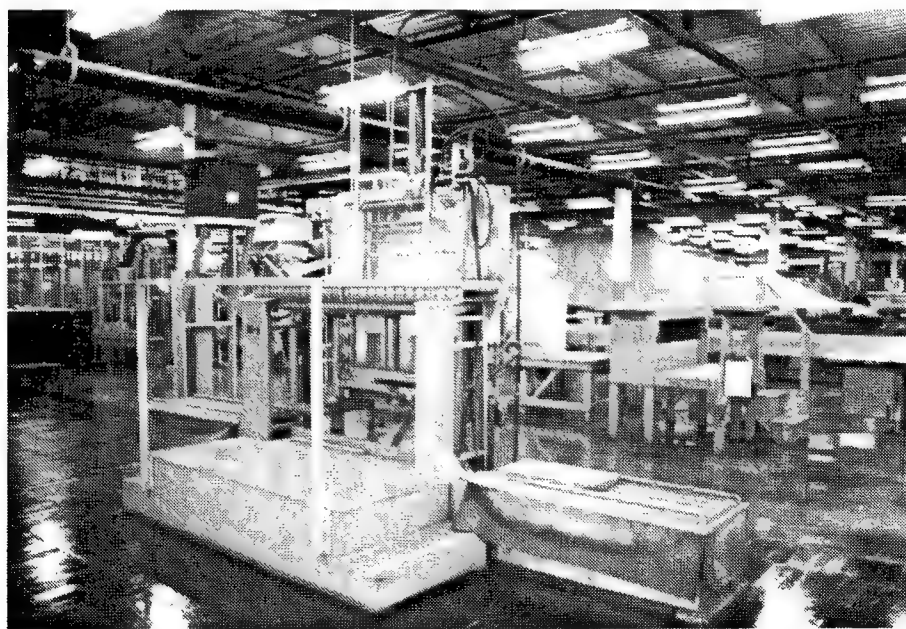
Building 3: A smaller, single "submarine" Wetproof Testing Machine manufactured by Triomachine Works, Andalusia, PA.
